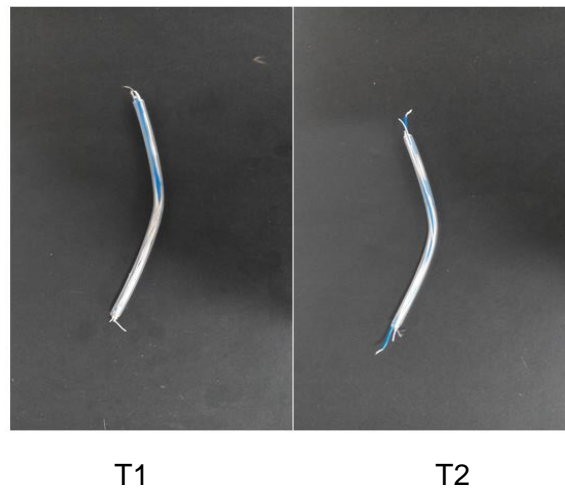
Specimens T1 and T2 viewed immediately after the bending test
